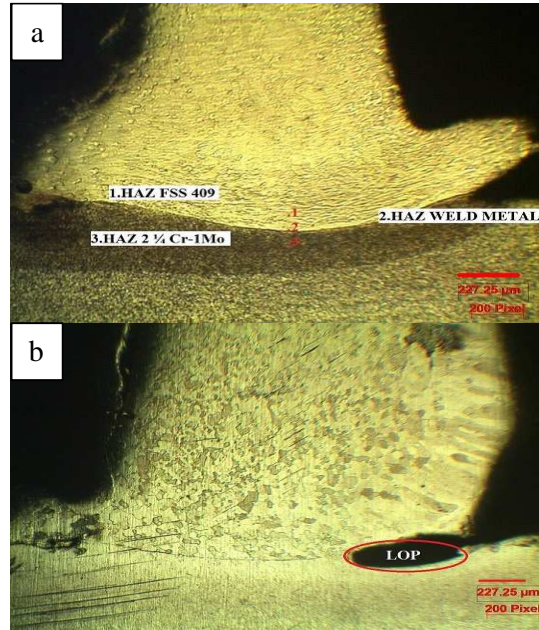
Light optical microscopy image of AISI 409 St-finned to 2 ¼ Cr-1Mo alloy steels tube, (a) Accepted sample: 100% weld joint and the sub-zones of the heat affected zone (HAZ), (b) Rejected sample: 78% weld joint.
